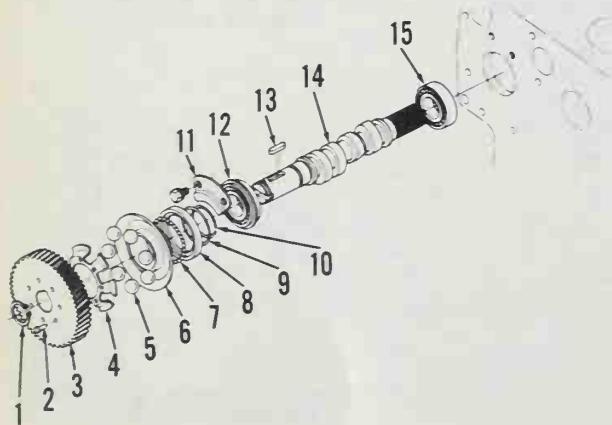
Exploded view of injection pump camshaft and governor components.
